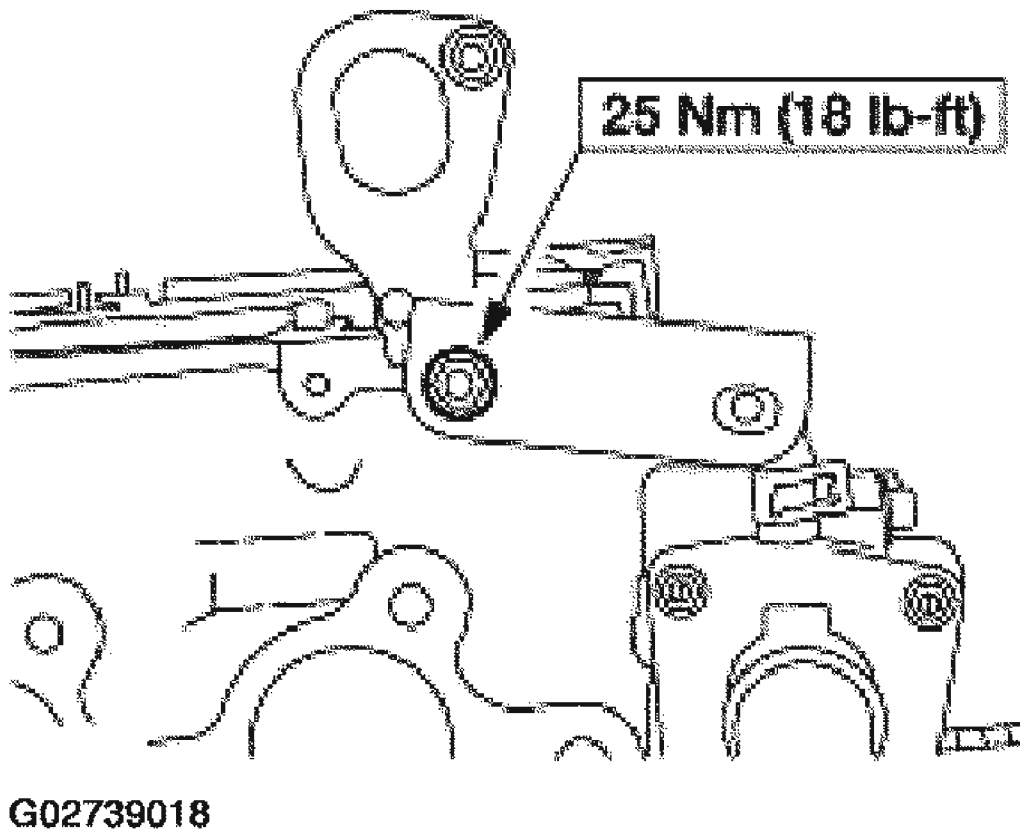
Identifying Front Lifting Eye Bolt Torque Specification
